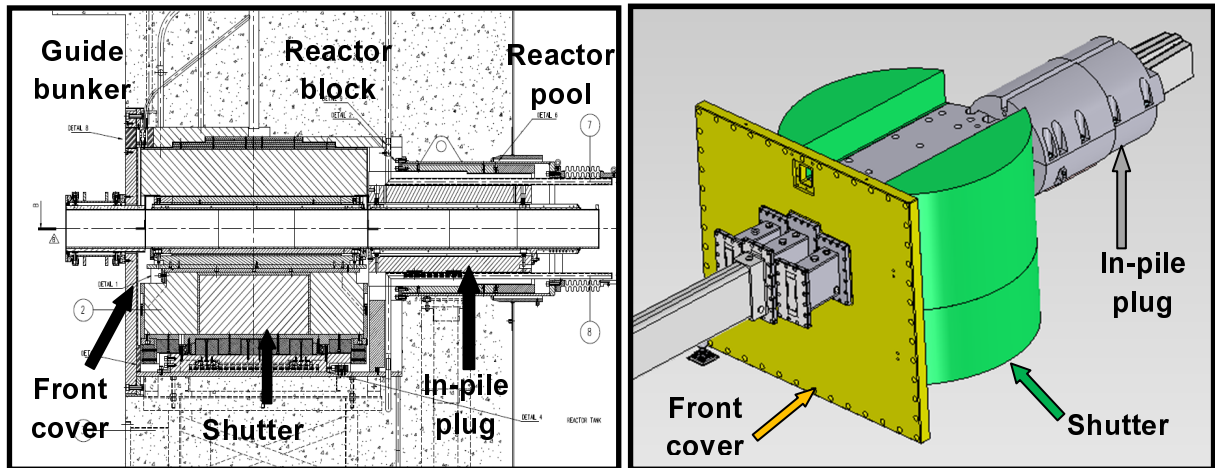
Neutron beam assembly CG1-3 cross-section and components
